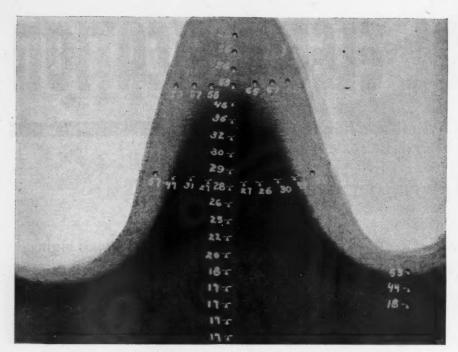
Contour hardening of a 36-in. diameter, 5-in. face gear with 9600 cycle induction equipment is shown by this tooth section. Result: high wear resistant surface, tough ductile core. Numbers are Rockwell "C" readings.
